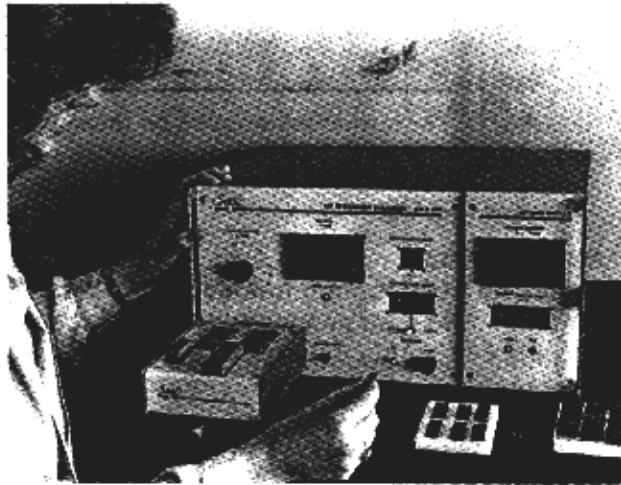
Typical die-attachment-evaluation test station for testing integrated circuits employs the Sage Model D.A.E. 400/012/017 instrument together with the T.F. 40 universal DIP test fixture. Using manual device insertion and removal, typical device test time is less than 2 seconds.
